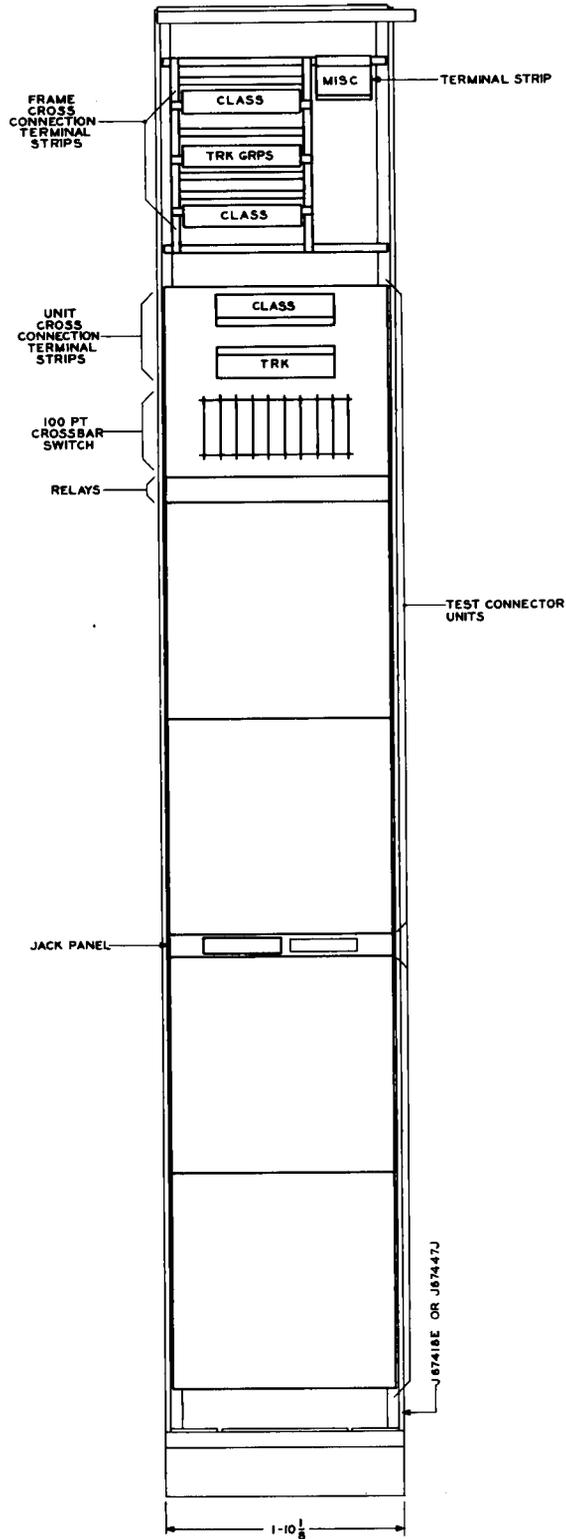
Outgoing Toll Connecting and Intertoll Trunk Test Connector Frames
